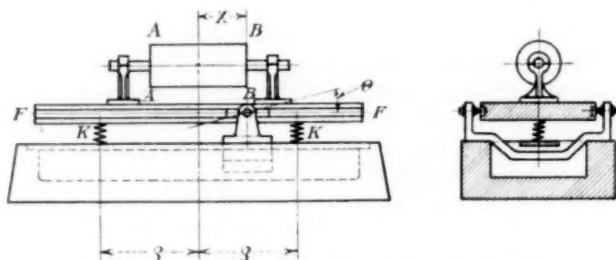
SCHEMATIC ARRANGEMENT OF BALANCING MACHINE
